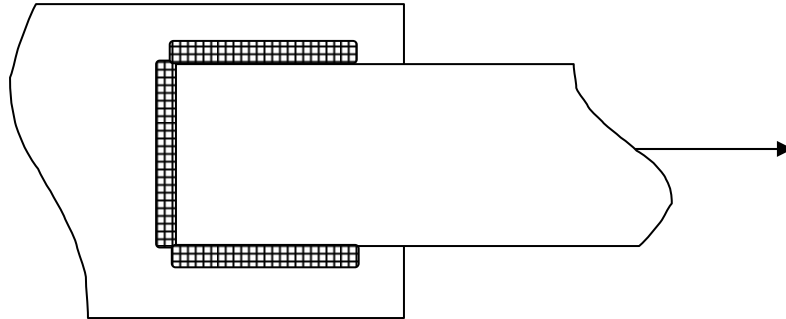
Joint with both transverse and longitudinal fillet welds
